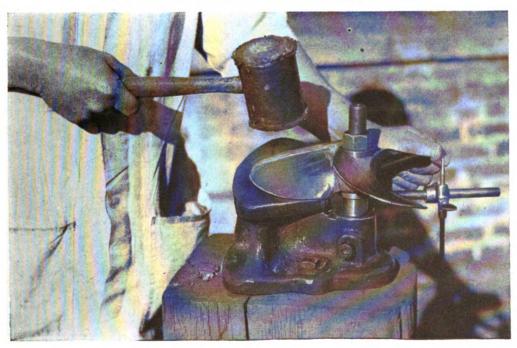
Straightening propeller on propeller pitch block. (Mallet is used to straighten bends and dents in propeller blades.)
